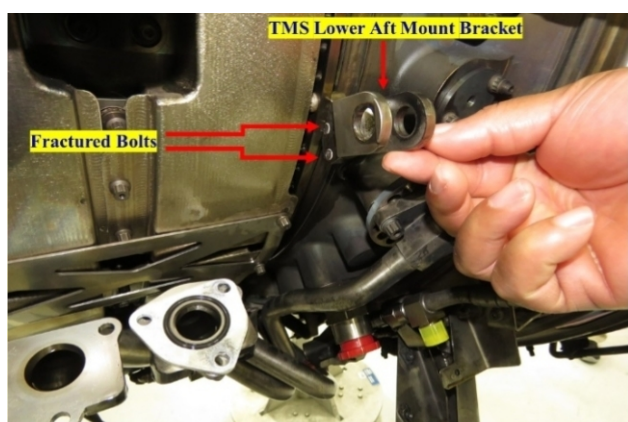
TMS Manifold Lower Aft Bracket with Fractured Bolts
